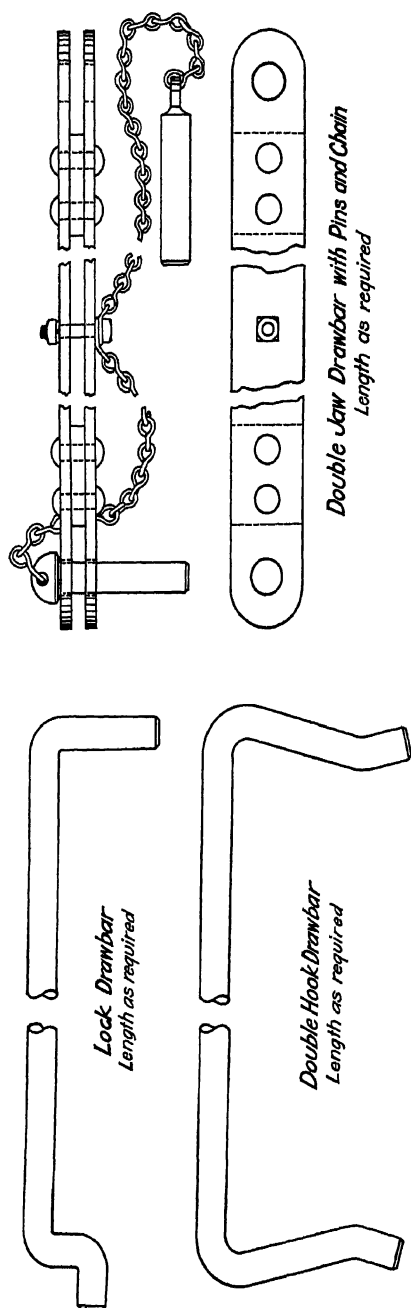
TYPICAL DESIGN FOR COUPLER DRAWBAR.
